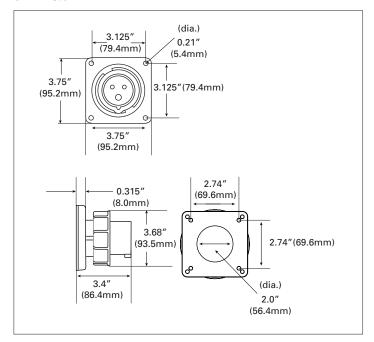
32A 2-P, 3-W & 3-P, 4, Front, Side & Back View Inlets
